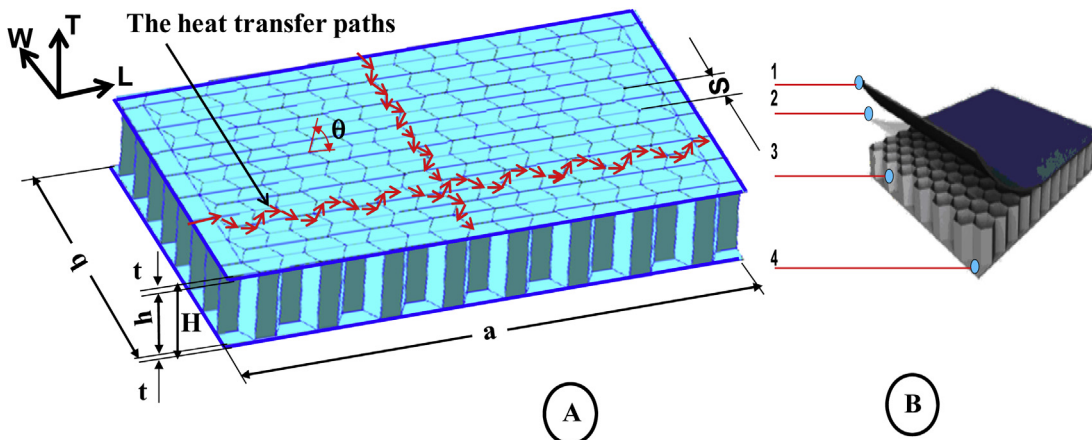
Honeycomb sandwich structure. (A) Honeycomb sandwich plate geometry and heat transfer parameters. (B) 1. External Aluminium skin, 2. Adhesive, 3. Aluminium honeycomb core, 4. Internal Aluminium skin.
